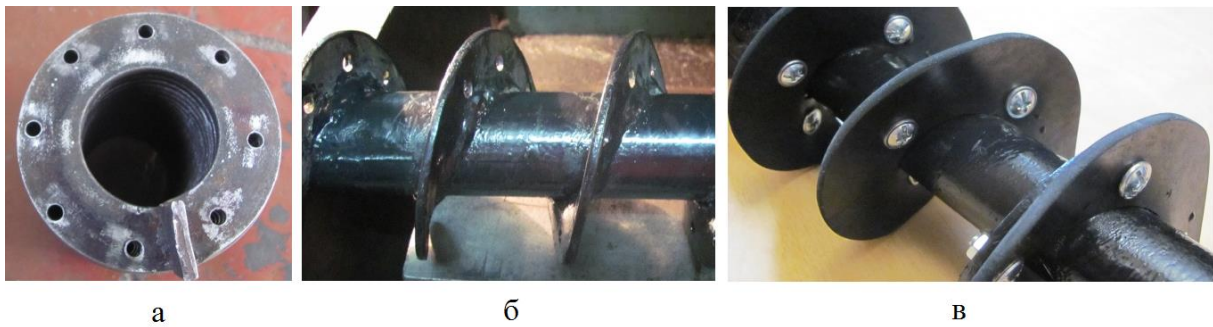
Manufacturing method for auger conveyor with elastic screw blade
